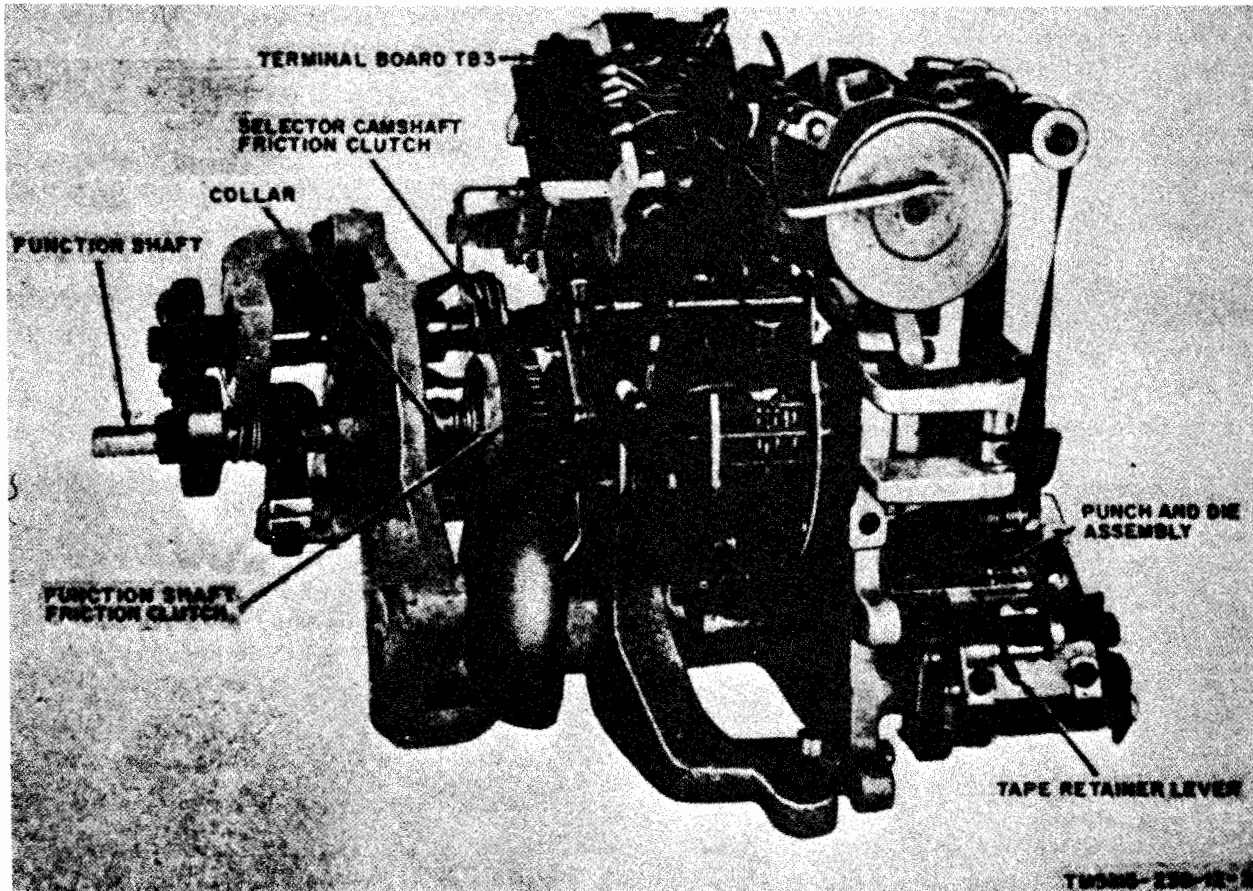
Reperforator, showing selector camshaft and function shaft friction clutches.
